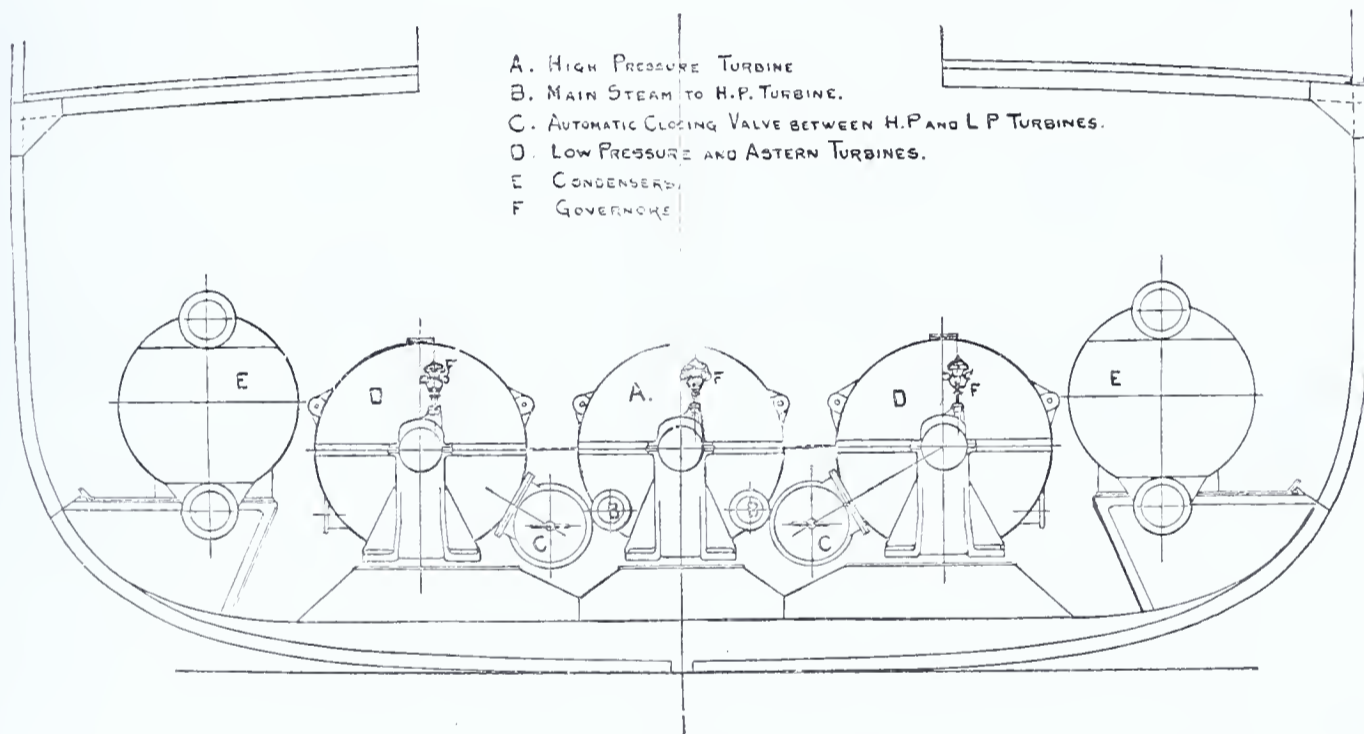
CROSS SECTION OF NEW TURBINE STEAMER, SHOWING END VIEW OF TURBINES.
